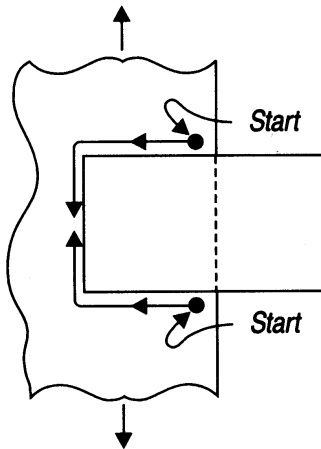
Suggested direction of welding travel to avoid notches.
